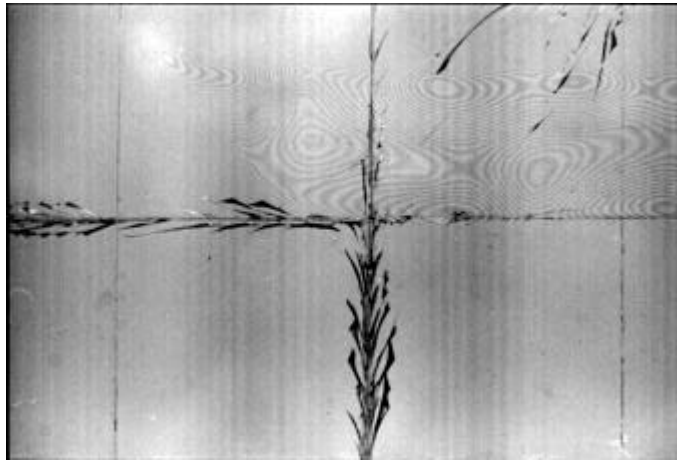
Foto of arrested cracks at edges of segments in composite plates
